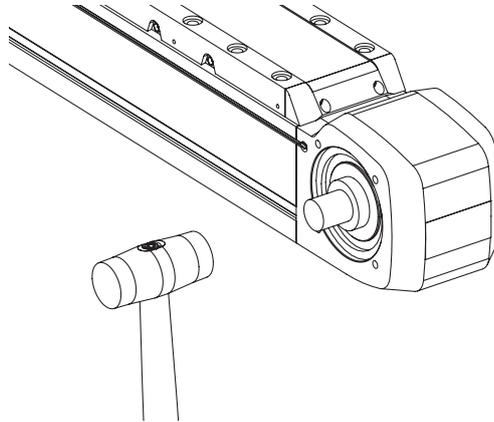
Inserting the journal in the linear axis HM-B drive block
